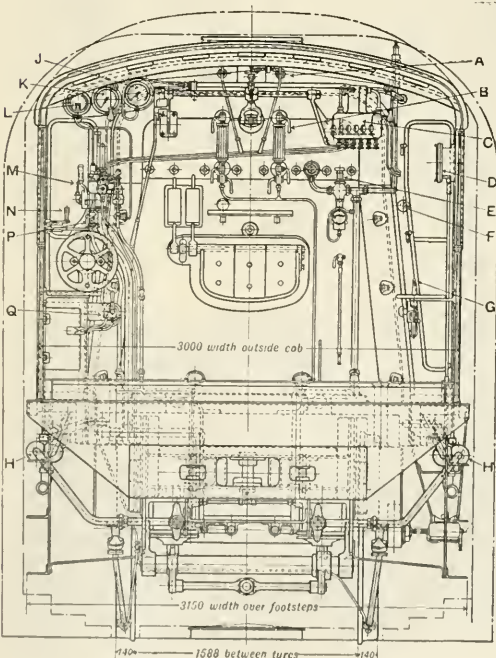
REAR VIEW AND ARRANGEMENT OF CAB
